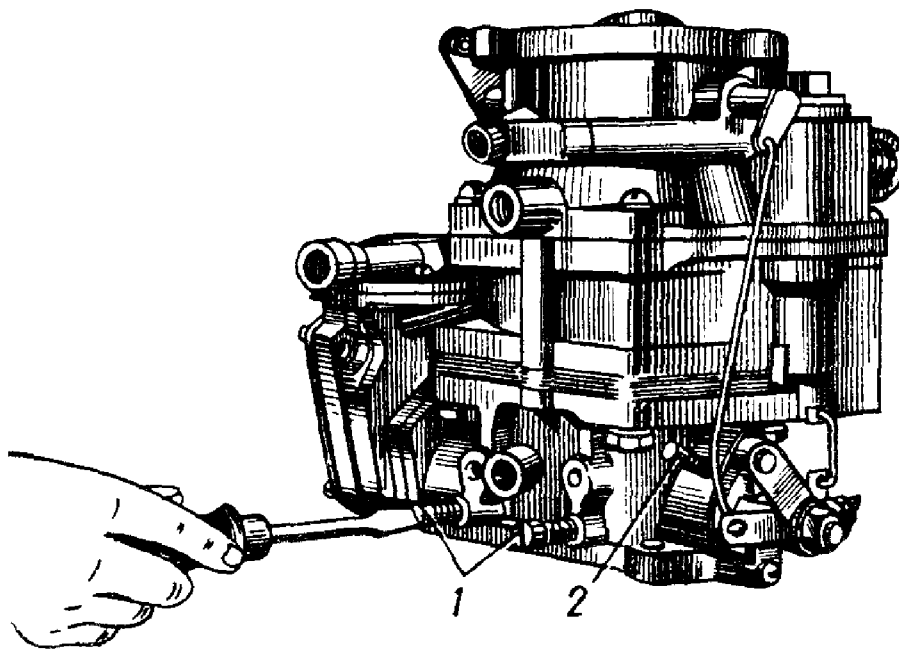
CARBURETTOR IDLE SPEED ADJUSTMENT
